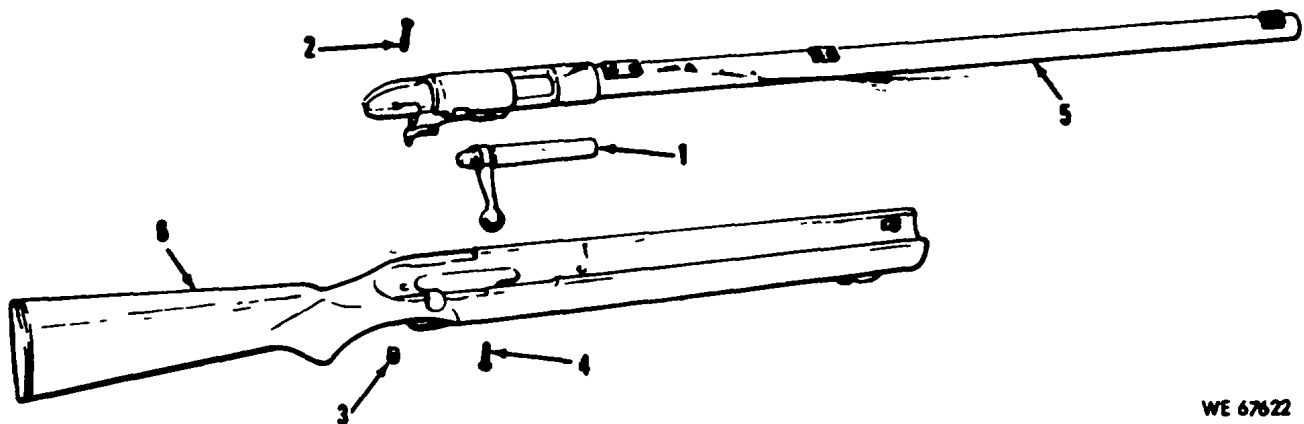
Major assembly and groups - Caliber .22 Winchester Rifle, Model 52D - exploded view.
